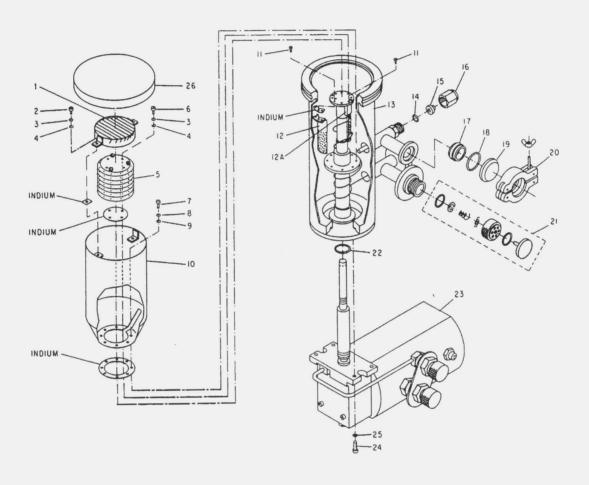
Exploded View of Cryo-Torr 100 Cryopump
